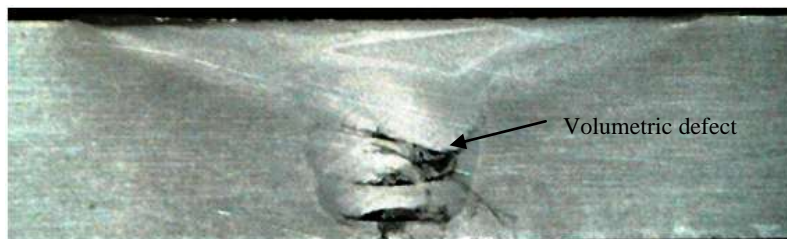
Macrostructure of weld generated at  $1.5^{\circ}$  tool tilt angle, 700 mm/min, 1260 rpm
